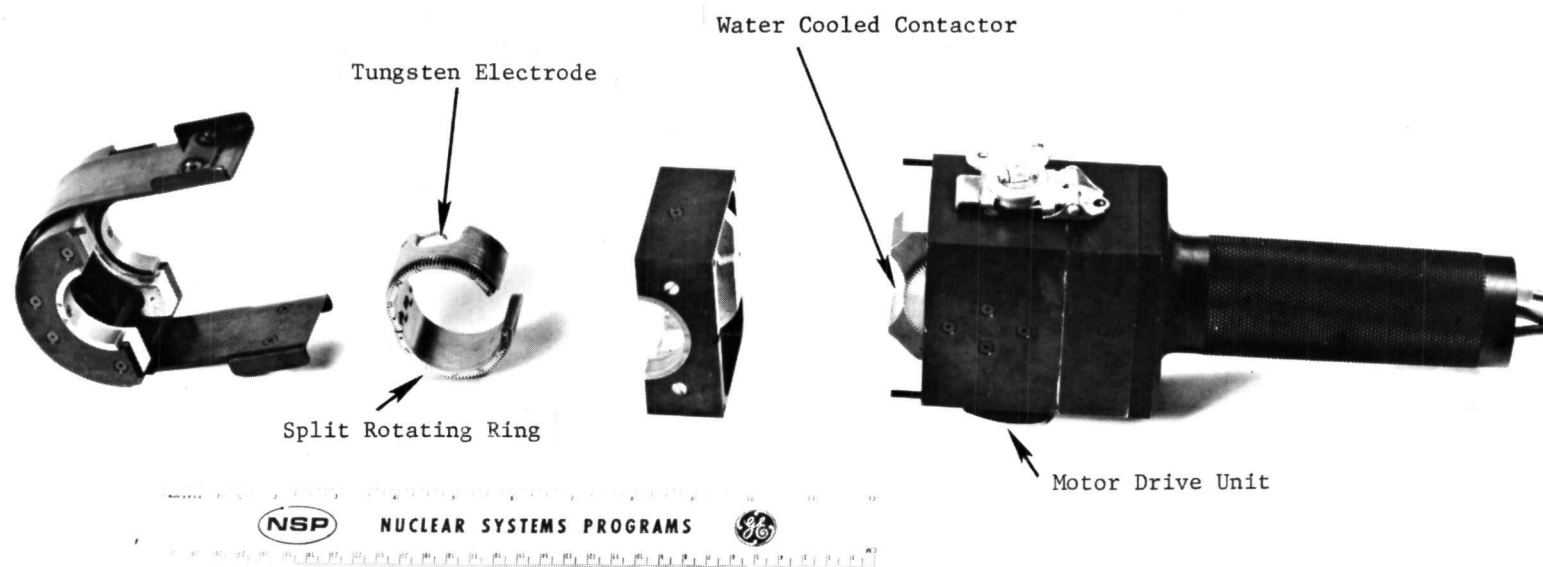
Special Water-Cooled Tube Welding Head. (P69-2-38B)
